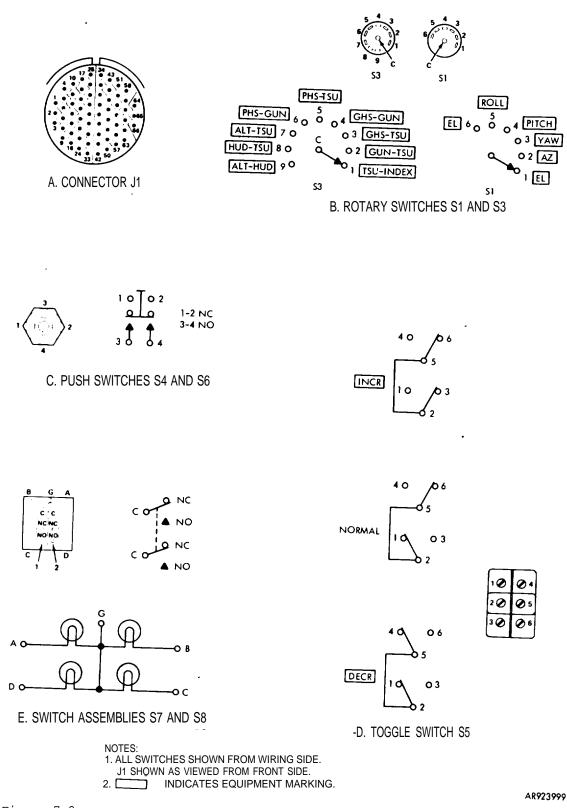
Panel Assembly Detail Parts, Terminal Orientation Diagrams
